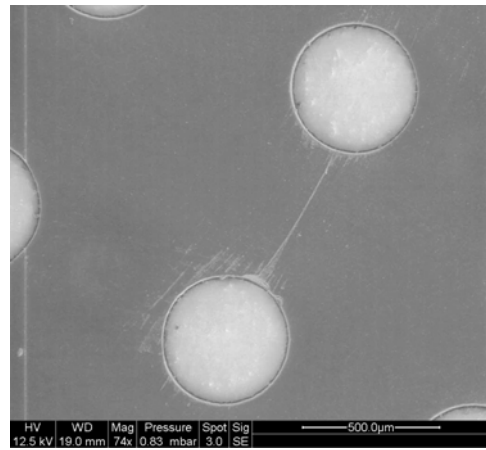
Solder mask damage on a BGA induced by the solder wick method
